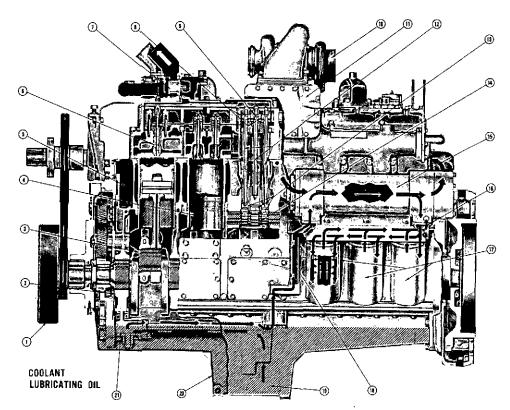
, (CWC-13.) Lubricating oil and coolant flow - side view, V-1710
